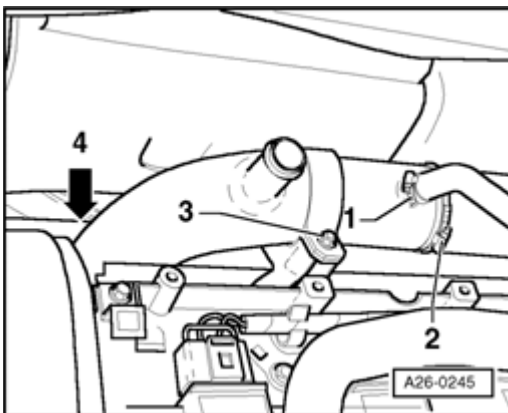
Identifying Air Pipe Clamps, Turbocharger Hose & Upper Air Line Hose
